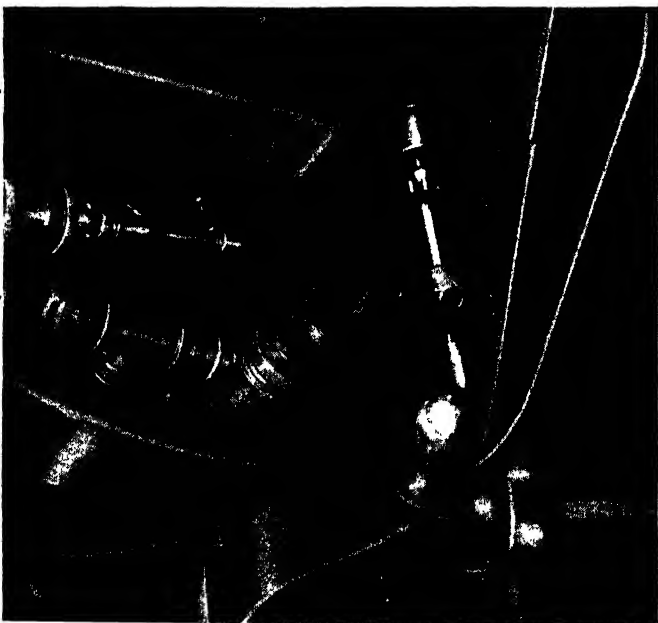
Grinding Teeth of Spur Gears on Two-wheel Type of Machine
